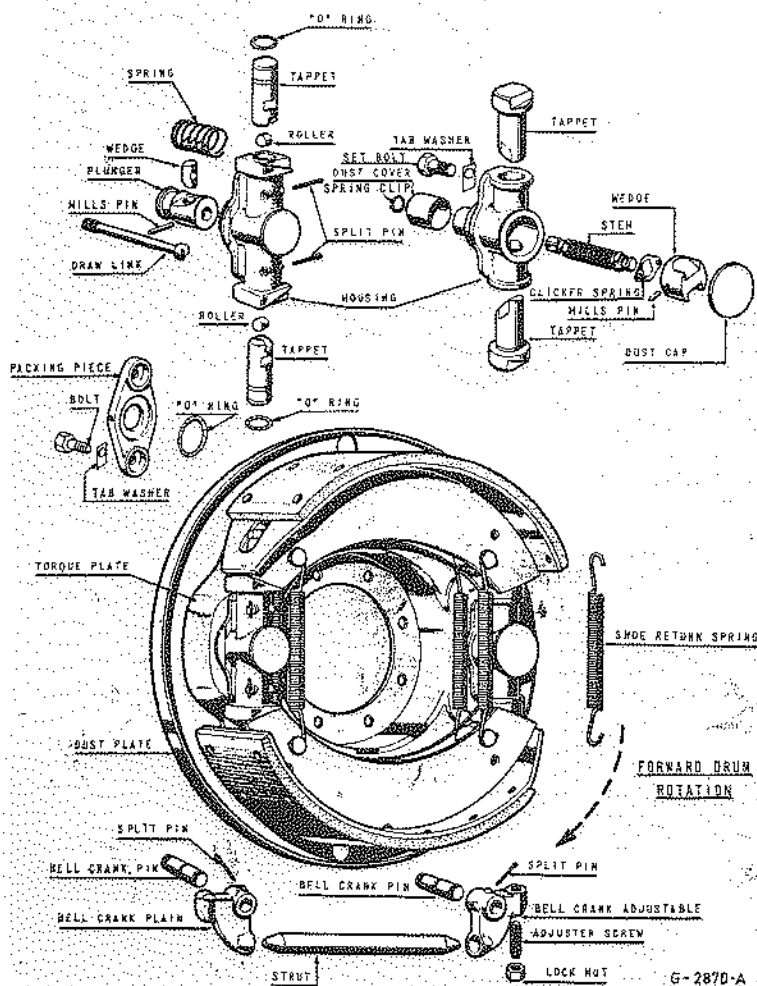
Exploded View of Heavy Duty Two Leading Shoe Brake
